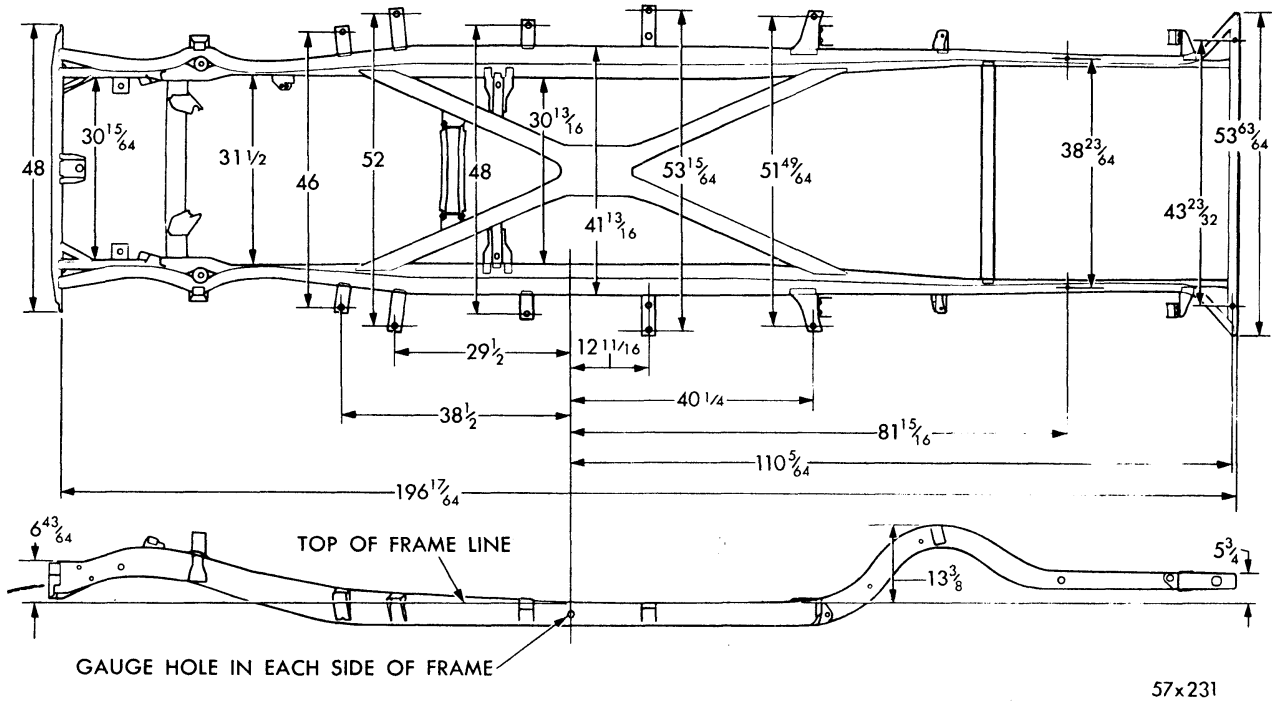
Frame Dimensions—Convertible (New Yorker)
